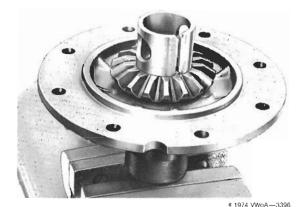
Differential gearshaft, cover, and thrust washers clamped together. Note clamping device.
